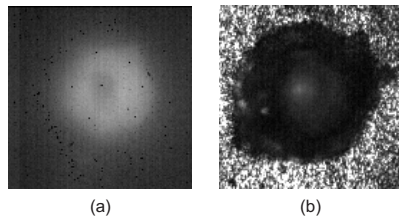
Frames of a welding sequence: (a) Melt pool without additional illumination (b) with additional illumination – direct view onto the melt pool.
